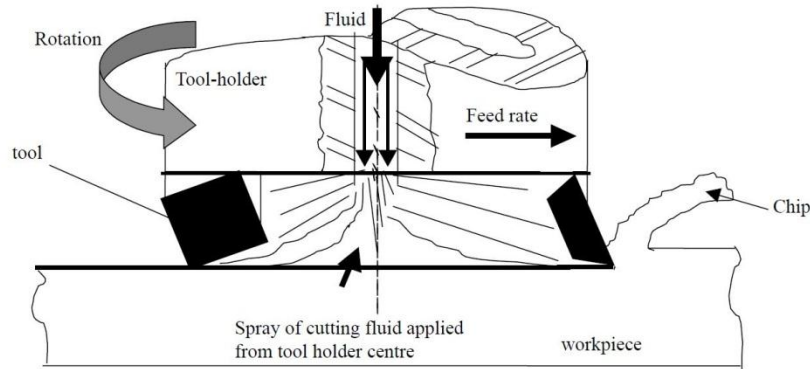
, schematic view of a through-the-tool MQL cooling system designed by Sales et al. [131] for face-milling
